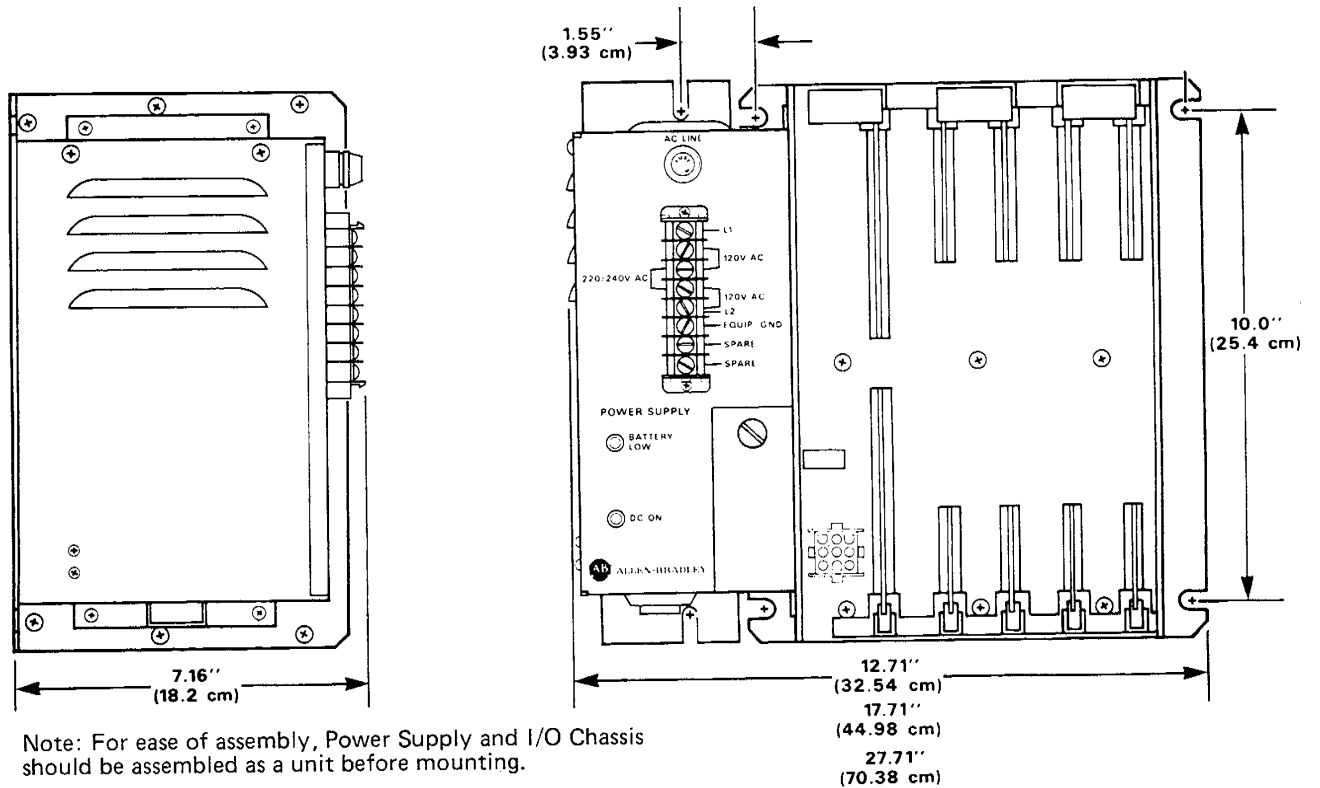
I/O Chassis Dimensions (Power Supply Separate)
